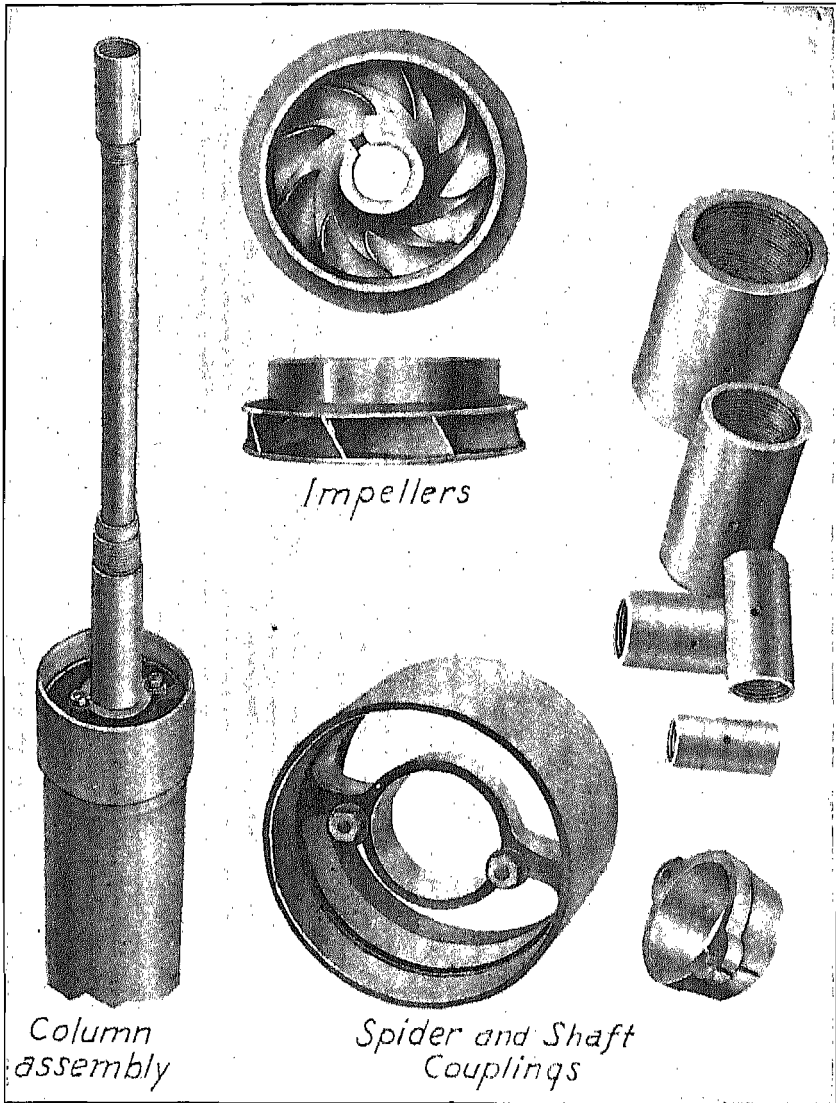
Assembly and parts of a deep-well turbine pump. (Courtesy Byron Jackson Company.)
